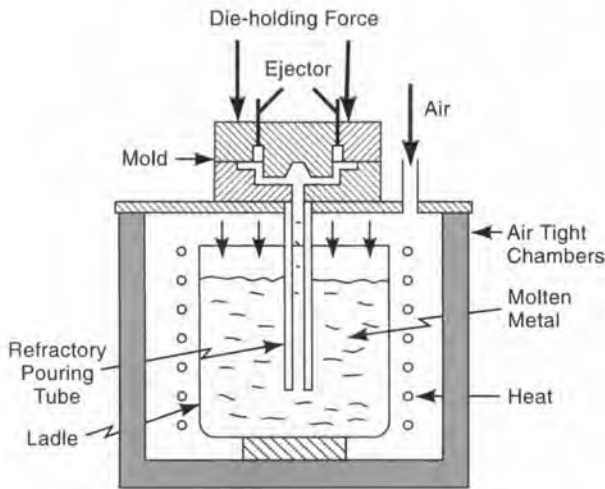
D2 Schematic view of low-pressure permanent mold casting. Air pressure forces the molten metal to flow upward against gravity and fill the mold. (from Schey, *Introduction to Manufacturing Processes*, McGraw-Hill, New York, 1987)
